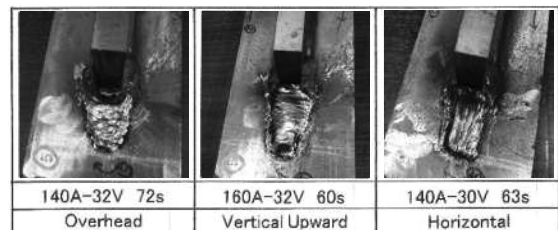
Example of boxing weld・elongated bead weld for every welding position
